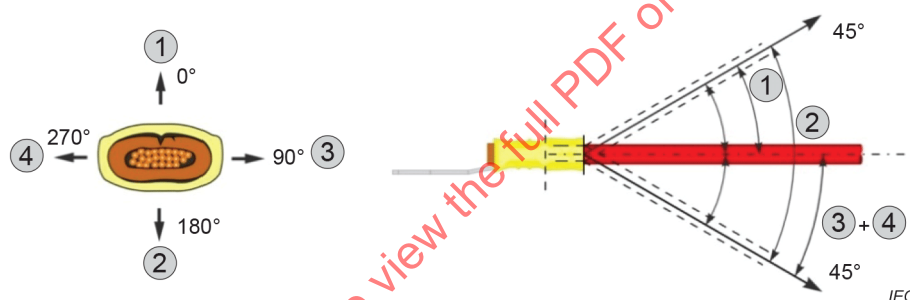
Bending test of crimped connections with pre-insulated crimp barrels
